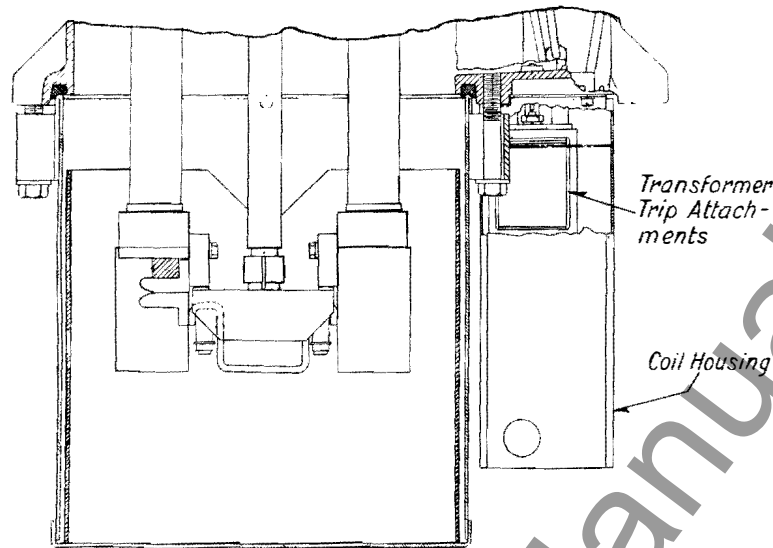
BREAKER UNIT WITH TRANSFORMER TRIP COIL
